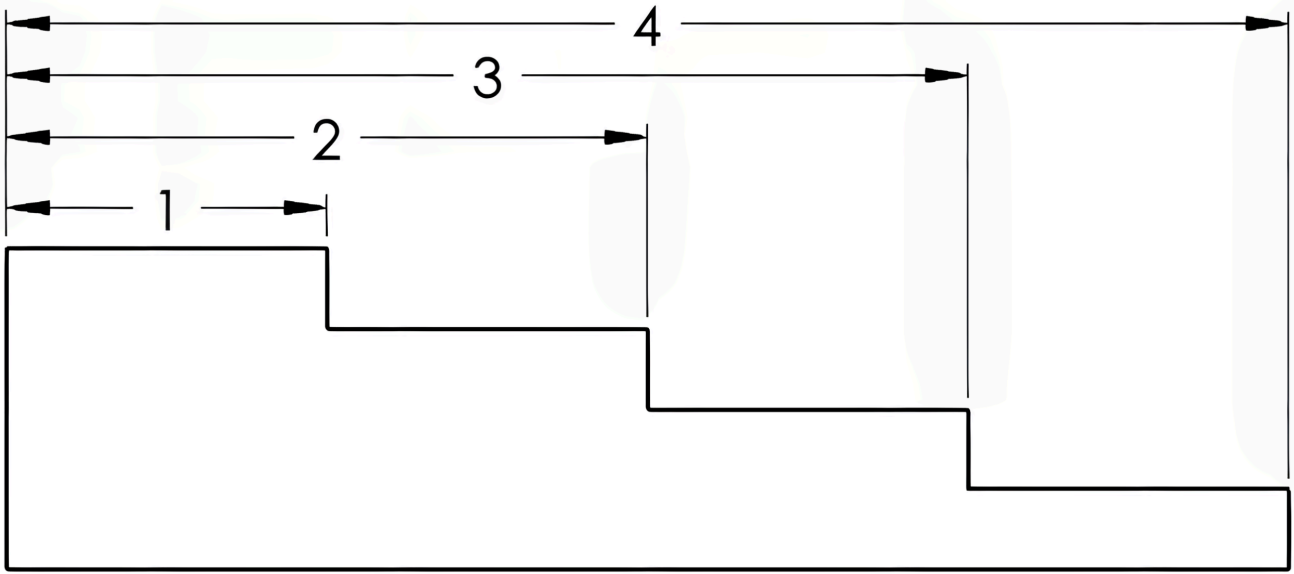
Datum dimensioning using dimension and extension lines.
